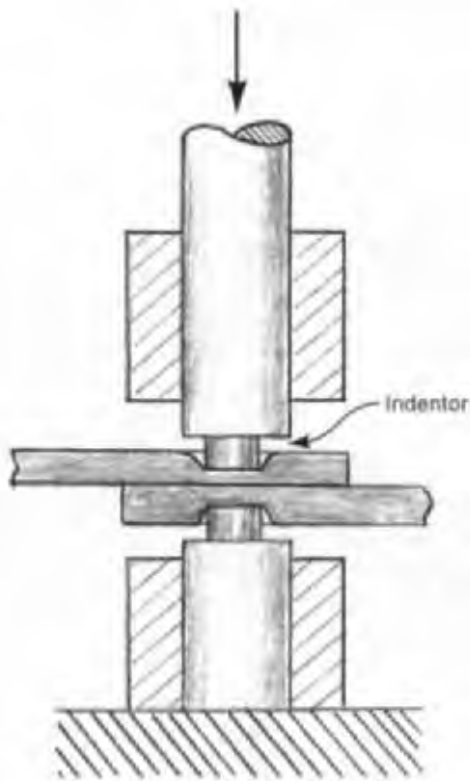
C13c Cold welding. Pressure from the opposing indentors deforms the workpiece metal and causes the mating surfaces to fuse together without application of heat.
